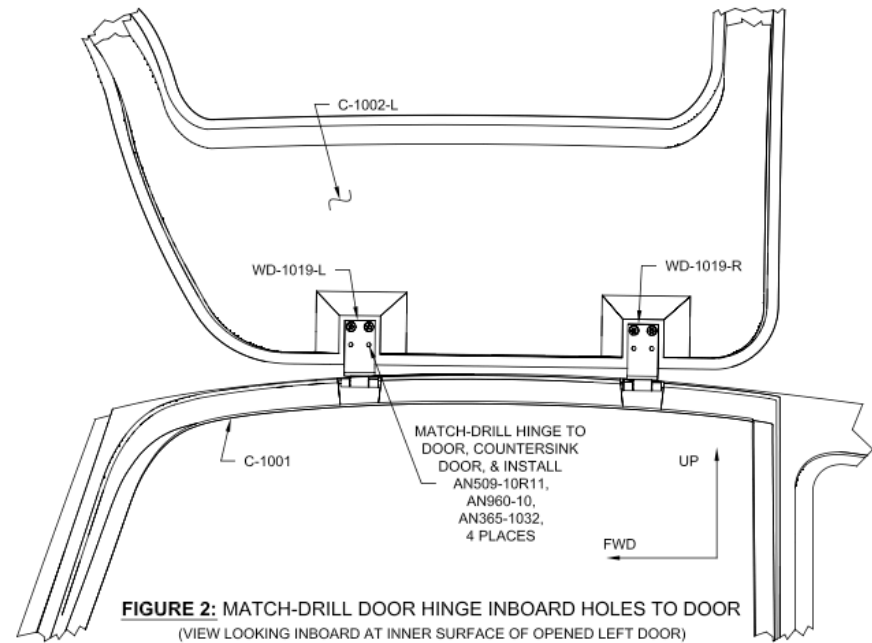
MATCH-DRILL DOOR HINGE INBOARD HOLES TO DOOR
